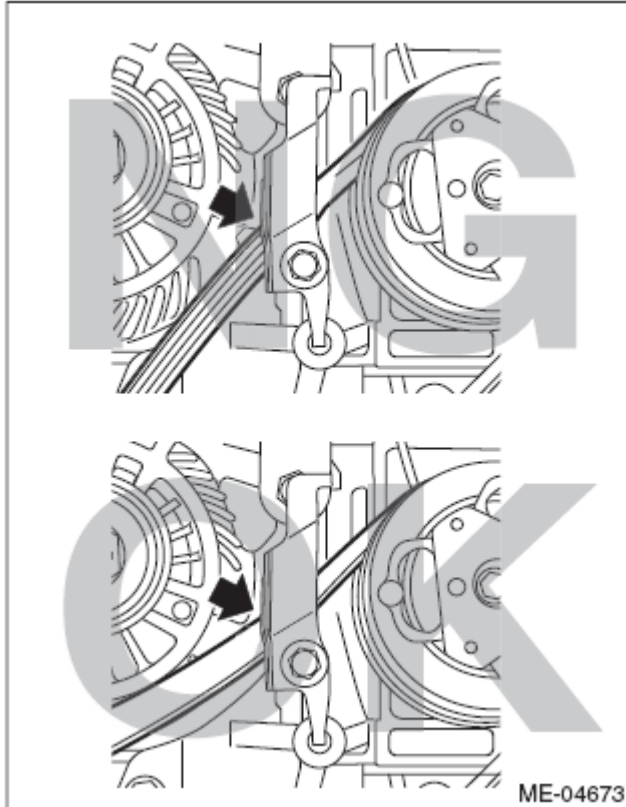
Identifying Proper And Improper Holding Rear Side Belt
